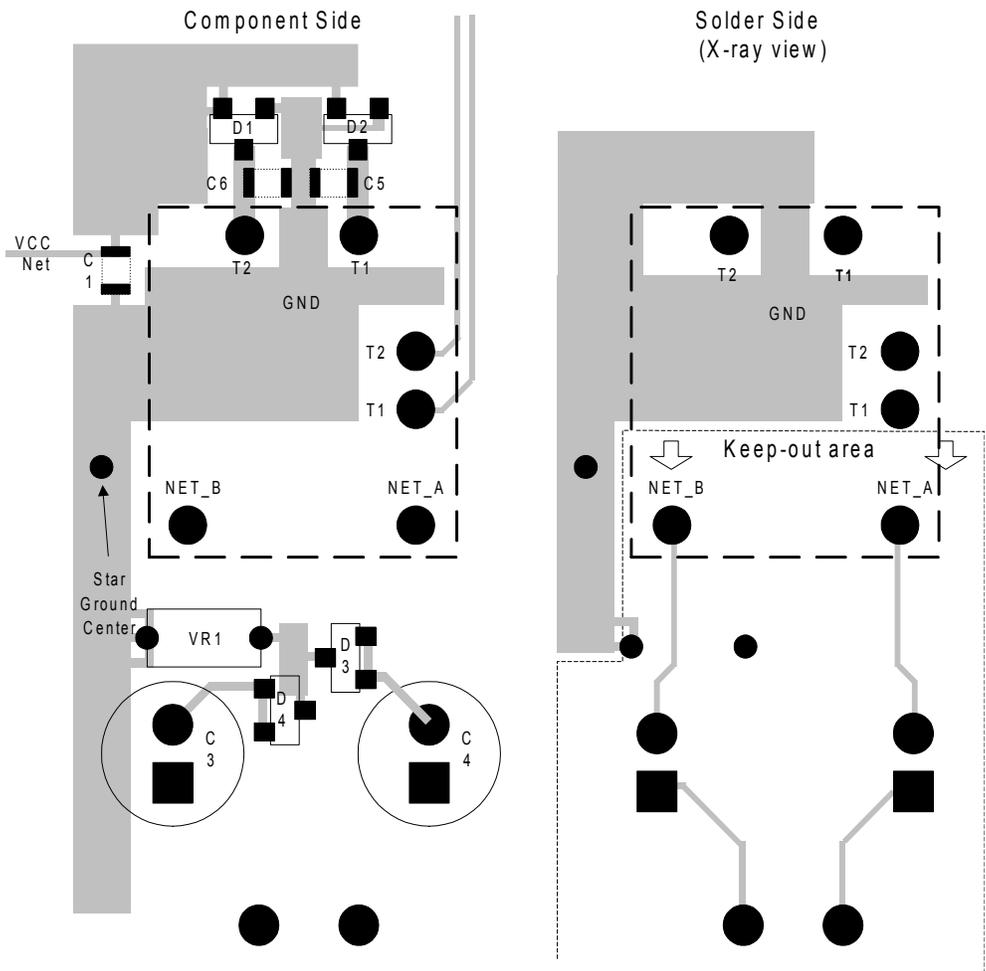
FT Smart Transceiver PCB Layout (with FT-X1 Transformer)
